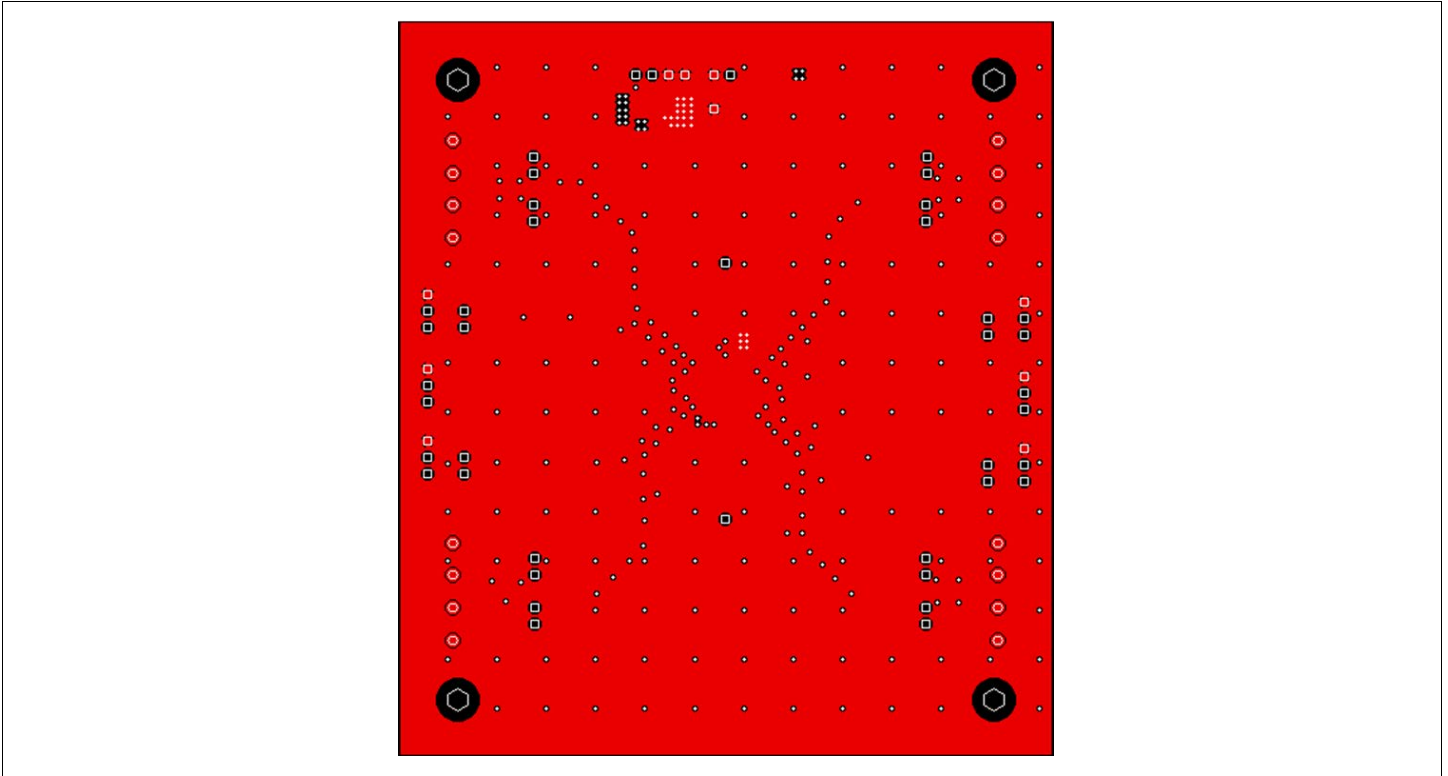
EVK PCB Layer 3—Power Plane (NSOIC16)
